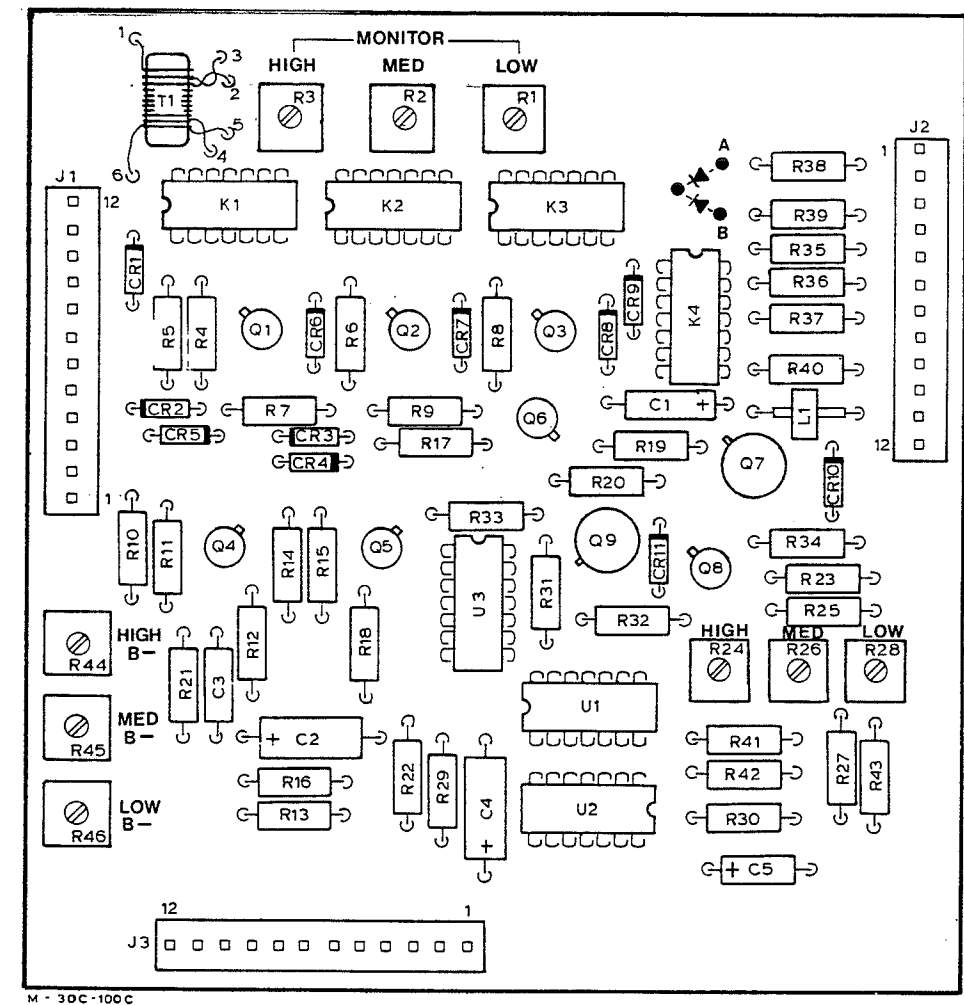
Assembly Detail - NAPC9/1 Interface PCB Assembly
